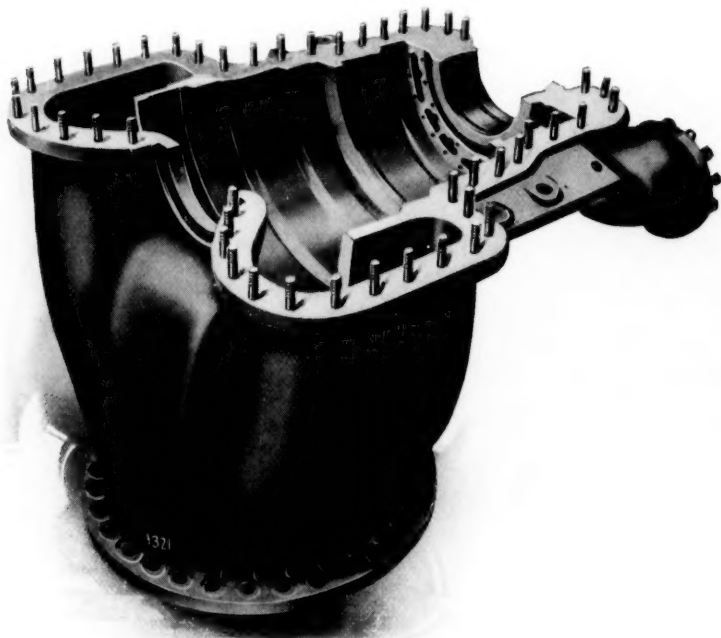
WHEEL CASE OF DE LAVAL MULTI-STAGE STEAM TURBINE
